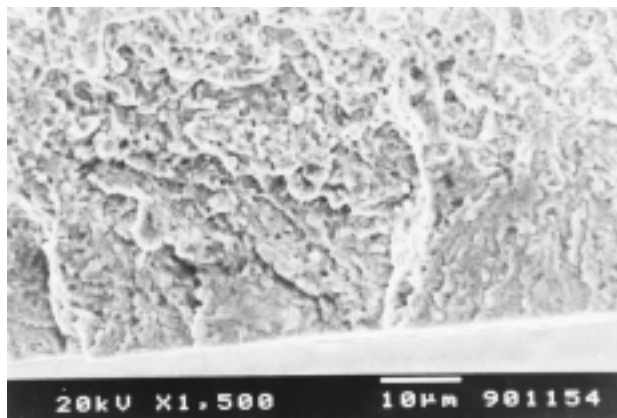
Fracture surface of nitrided tool (500 °C, 60 min) - close the surface
